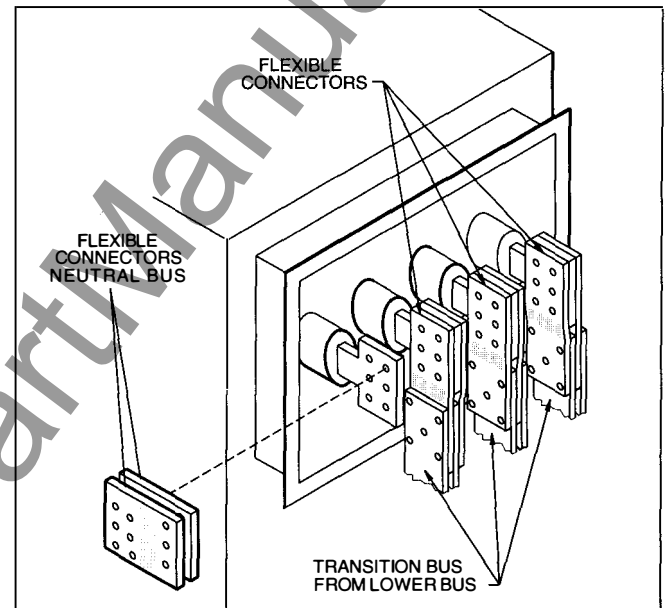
Transformer Throat Connection (Lower Bus Shown, Upper Bus Similar)
